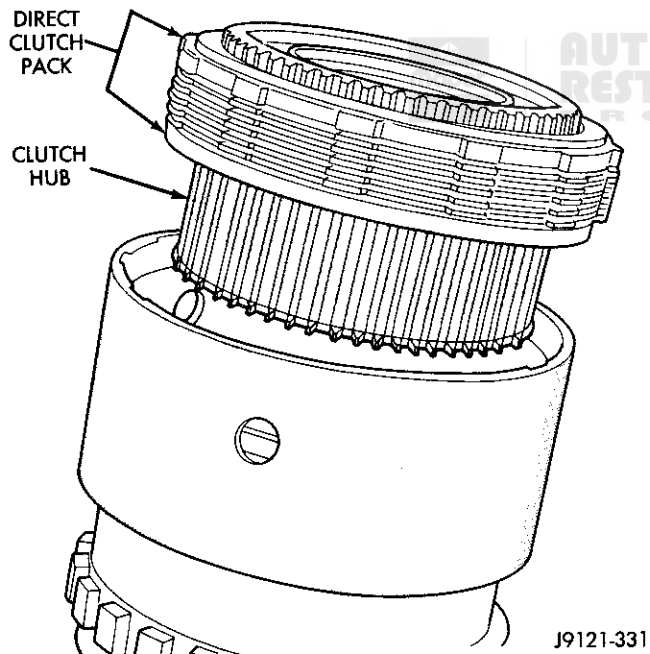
Installing Assembled Direct Clutch Pack And Hub
